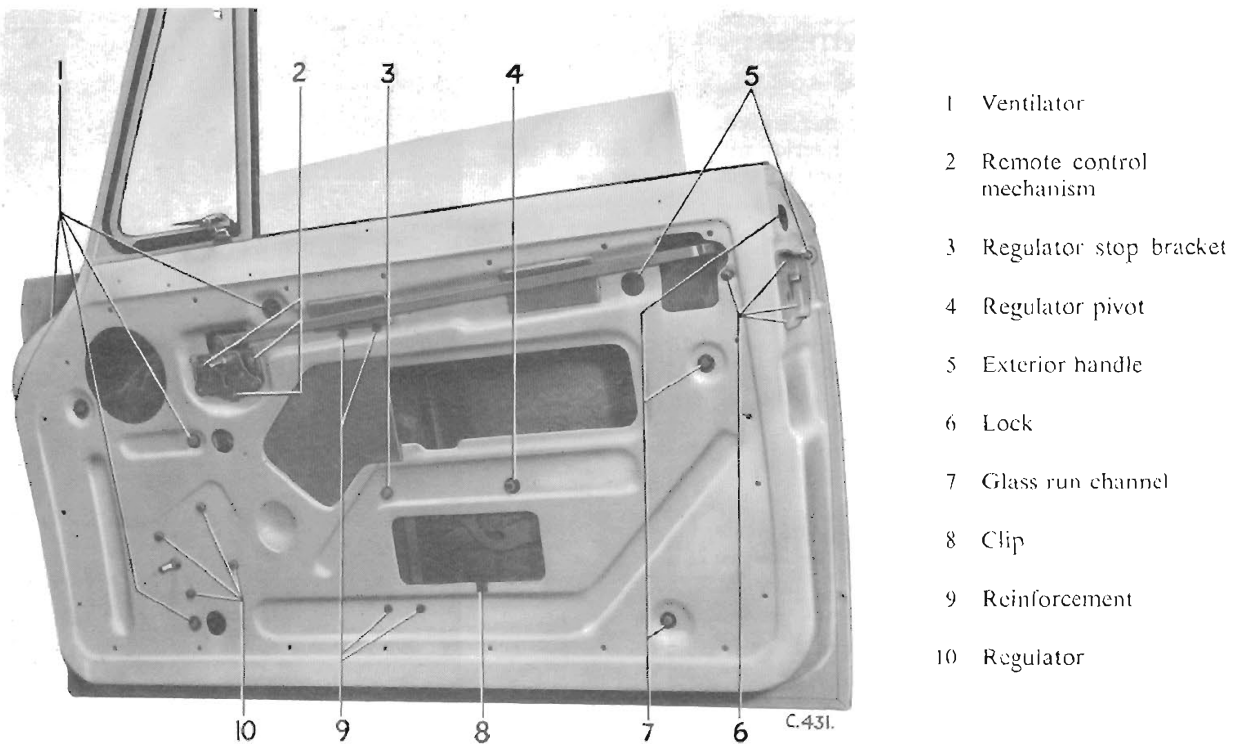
Location of door component fixings (Herald 1200, 12/50 and Vitesse)
